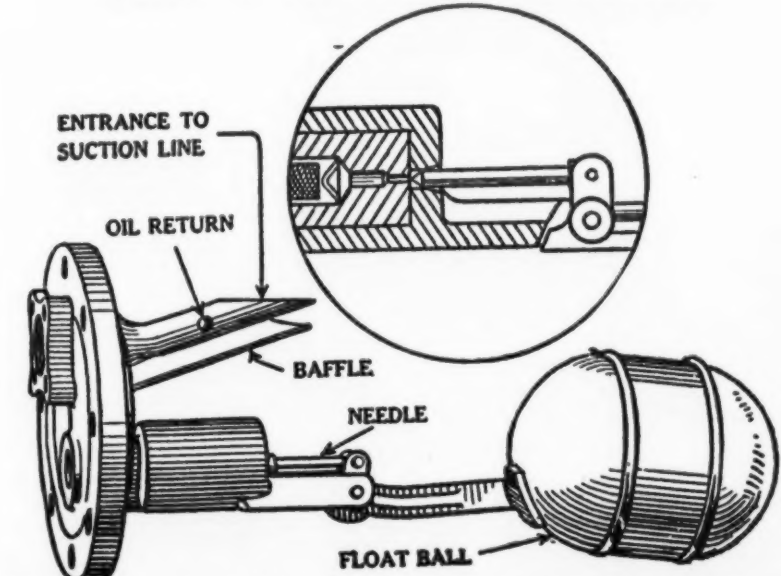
Drawing showing detail of float valve construction. Insert shows how needle is constructed.
